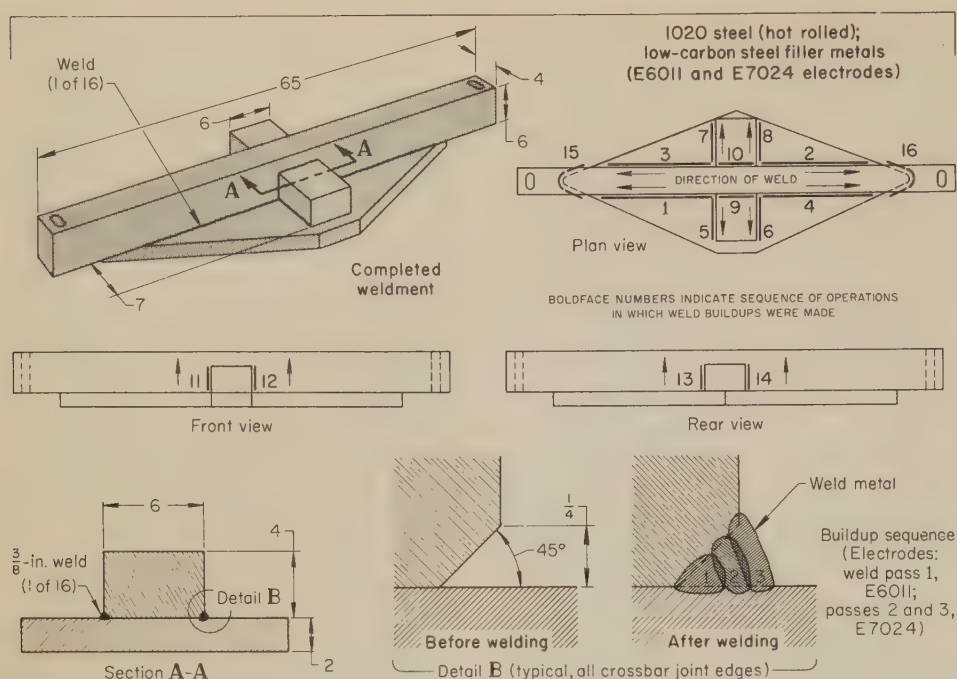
Truck-axle weldment joined with 16 welds, in which cracking was prevented by beveling joint edges of the two 7-in.-long crossbars, welding in three passes instead of two, and welding in directions of decreasing restraint, in the sequence shown (Example 6)
